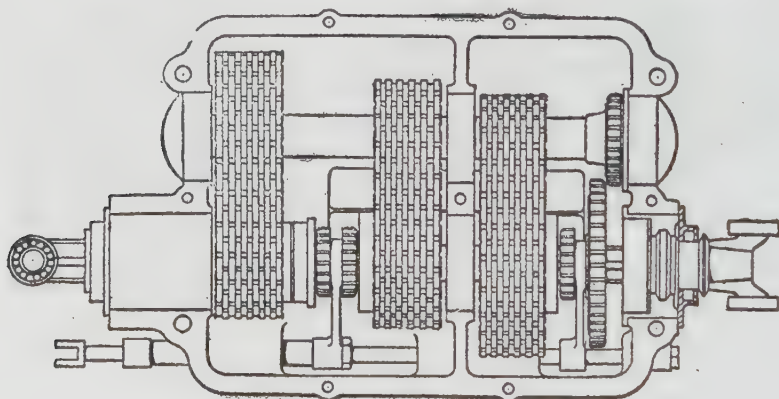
SILENT CHAIN CHANGE GEAR.
